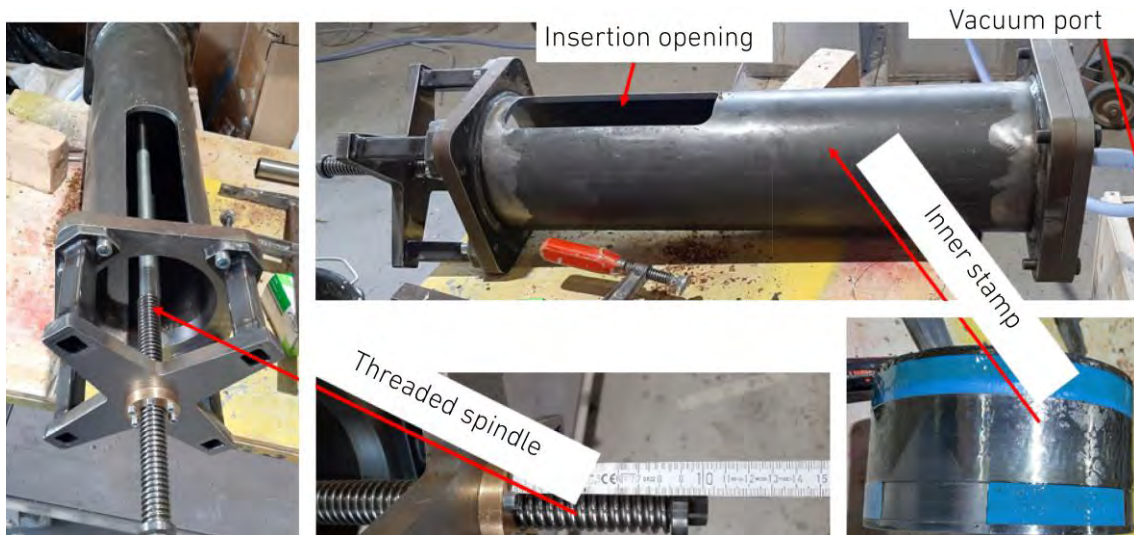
Vacuum pressing fabrication process of wood-fibre composites
